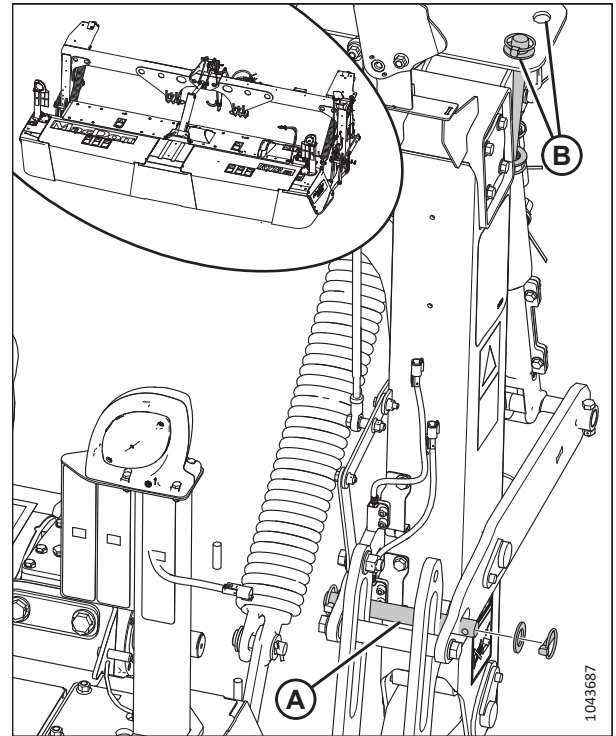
Auxiliary Lift Lock Pins – Left Side
